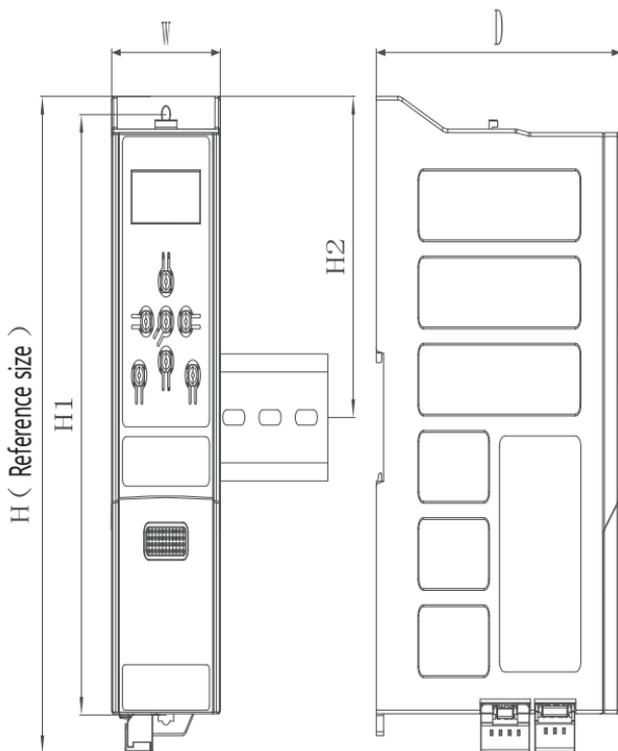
Installation Dimensions of T1 ~T2 Frame Size Outline
